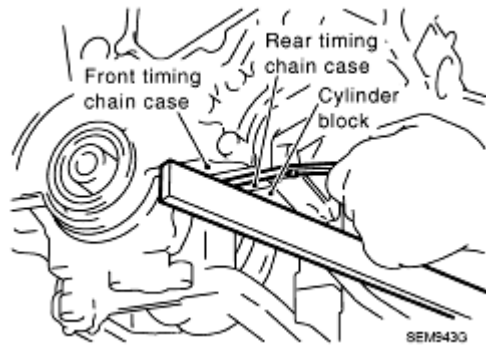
Checking Surface Height Difference Between Following Parts On Oil Pan (Upper) Mounting Surface
